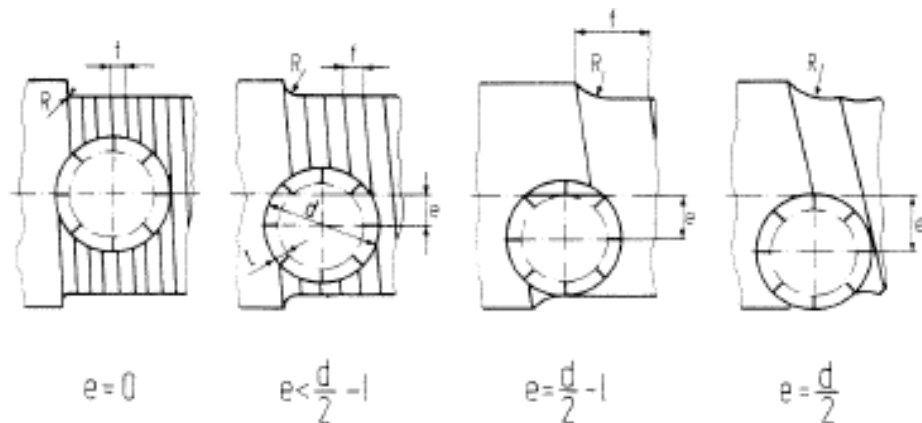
Positions of cutting tool and workpiece depends on eccentricity
